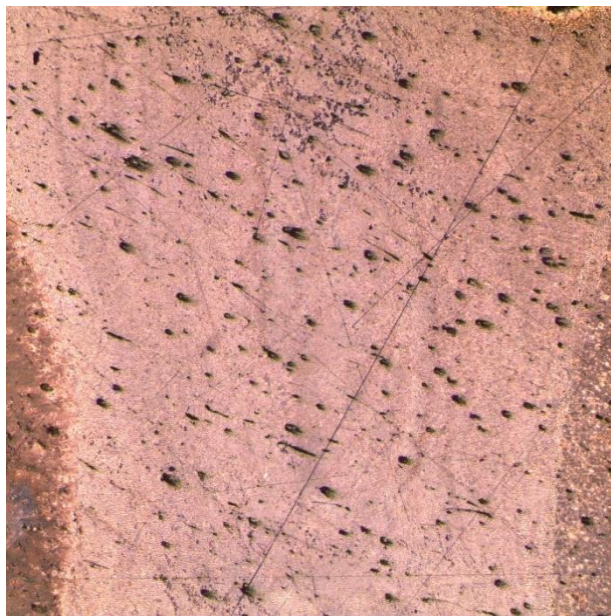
Microscopic holes observed in the welding pool in samples 5 and 6
